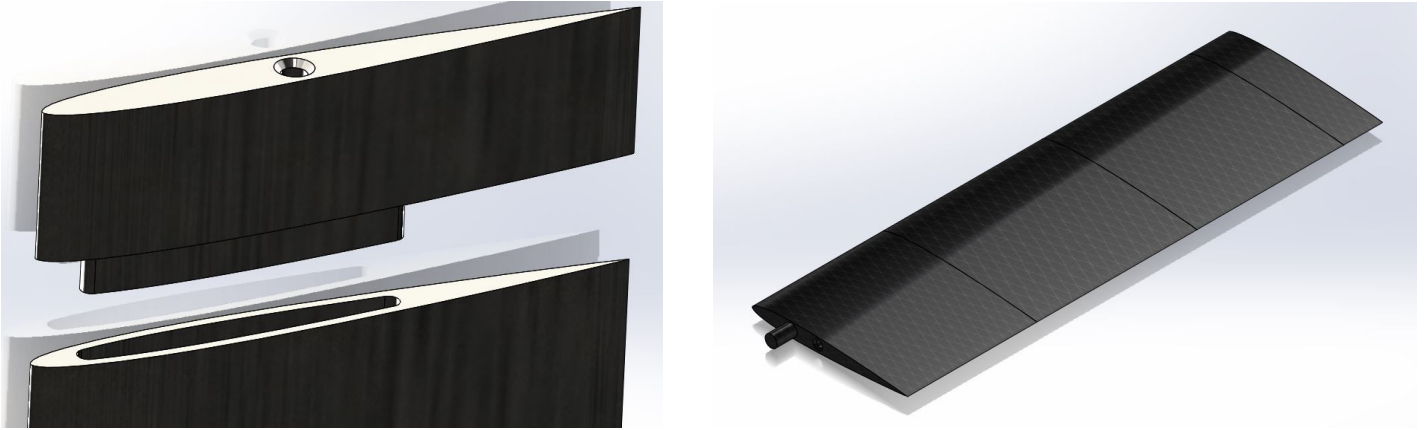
& 15. Connecting the airfoil together (14) and full Airfoil Assembly (15)
